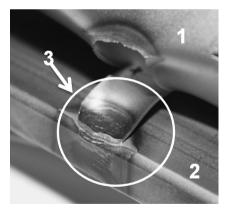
View of the weld nugget after destructive testing of welded joint-properly performed joint; 1) steel sheet, 2) closed profile, 3) surface fracture.
